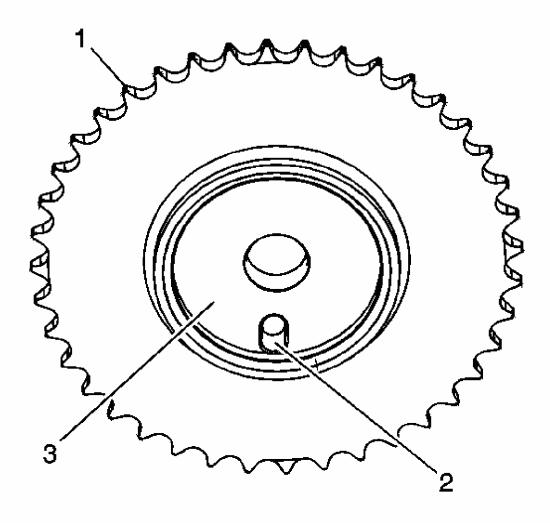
View Of Back Of Right Intake Camshaft Sprocket Courtesy of GENERAL MOTORS CORP.
